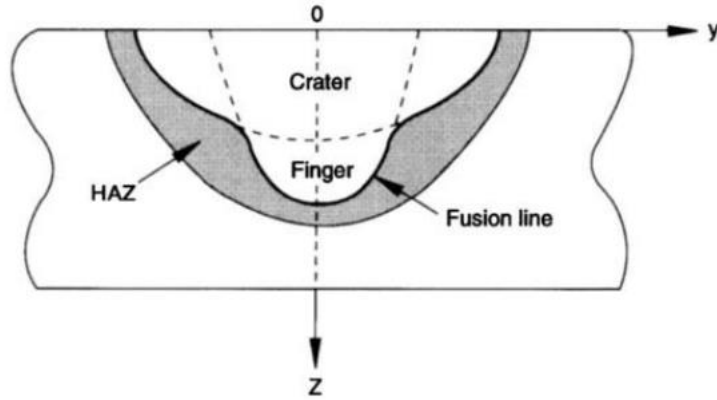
Example of a crater/finger weld tack taken from Grong et al. [120]
